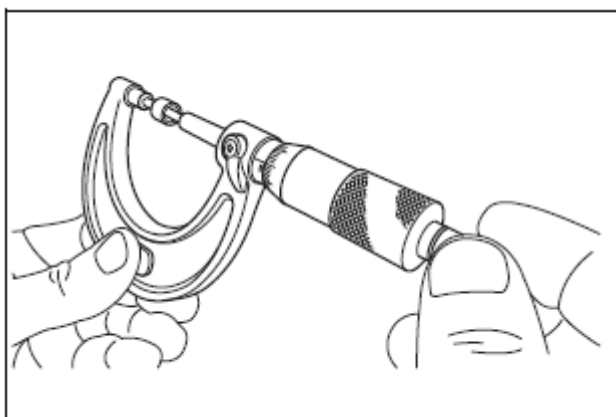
Measuring Thickness Of Valve Adjusting Shim Using Micrometer
